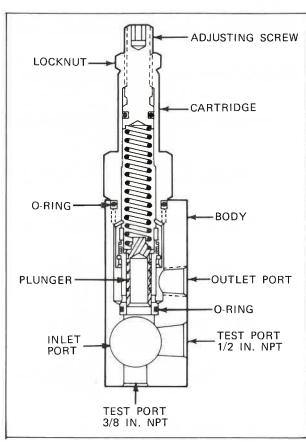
FUEL-OIL RELIEF AND REGULATING VALVE.
